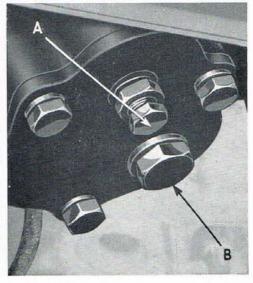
Location of rocker shaft adjuster screw and drain plug. A. Rocker shaft adjuster screw.B. Drain plug.
